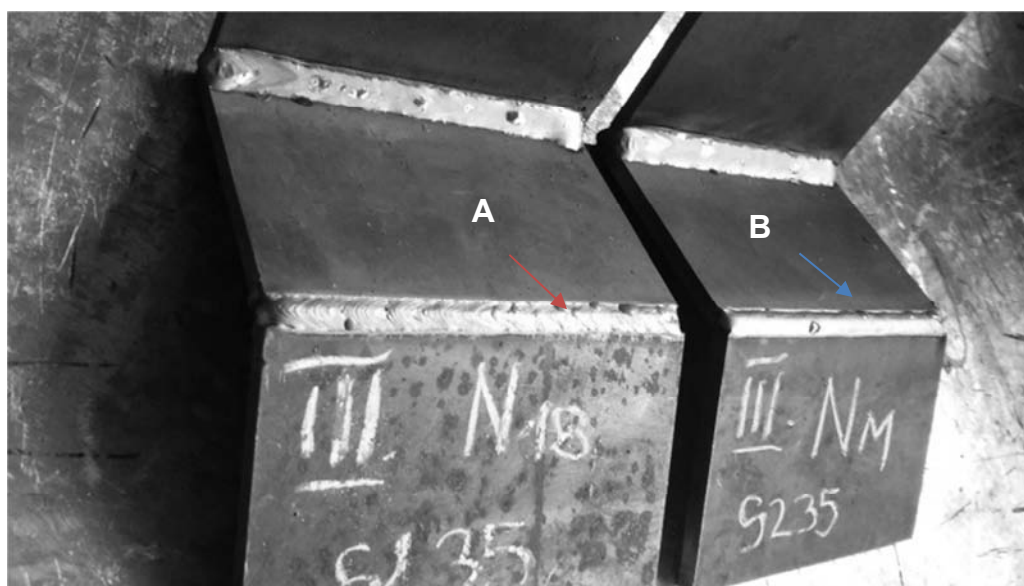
Weld 1, shielded with Ar+18 % CO₂, weld 2 with multi-component mixture
